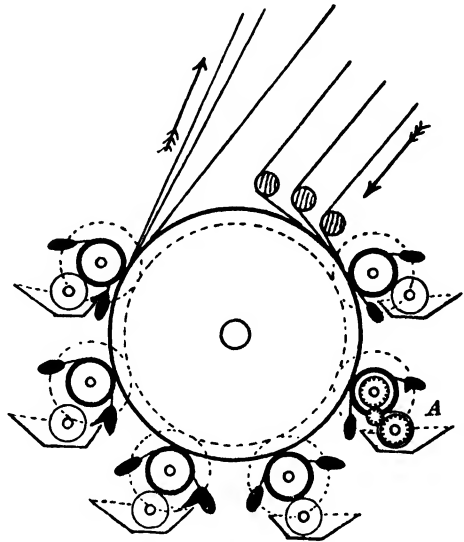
Diagrammatic section of a six-colour roller machine.
